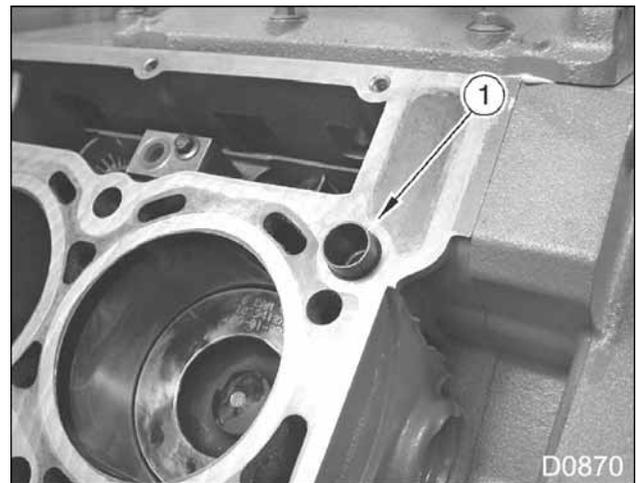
Cylinder head spring dowel pin in crankcase (typical)
